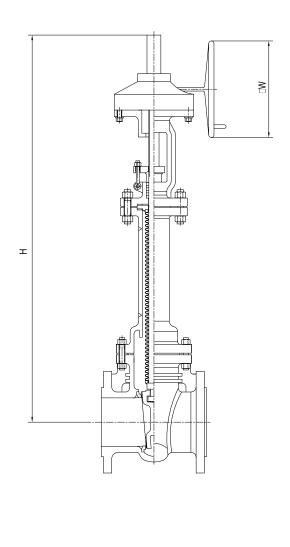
Sectional drawings of ECOLINE GTB 150-600
